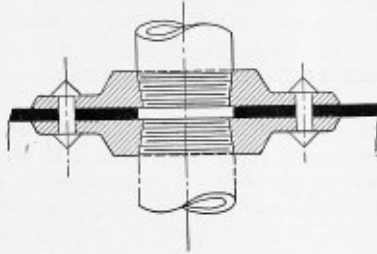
Forged or Cast Steel Pipe Flanges Substituted for Bushings
